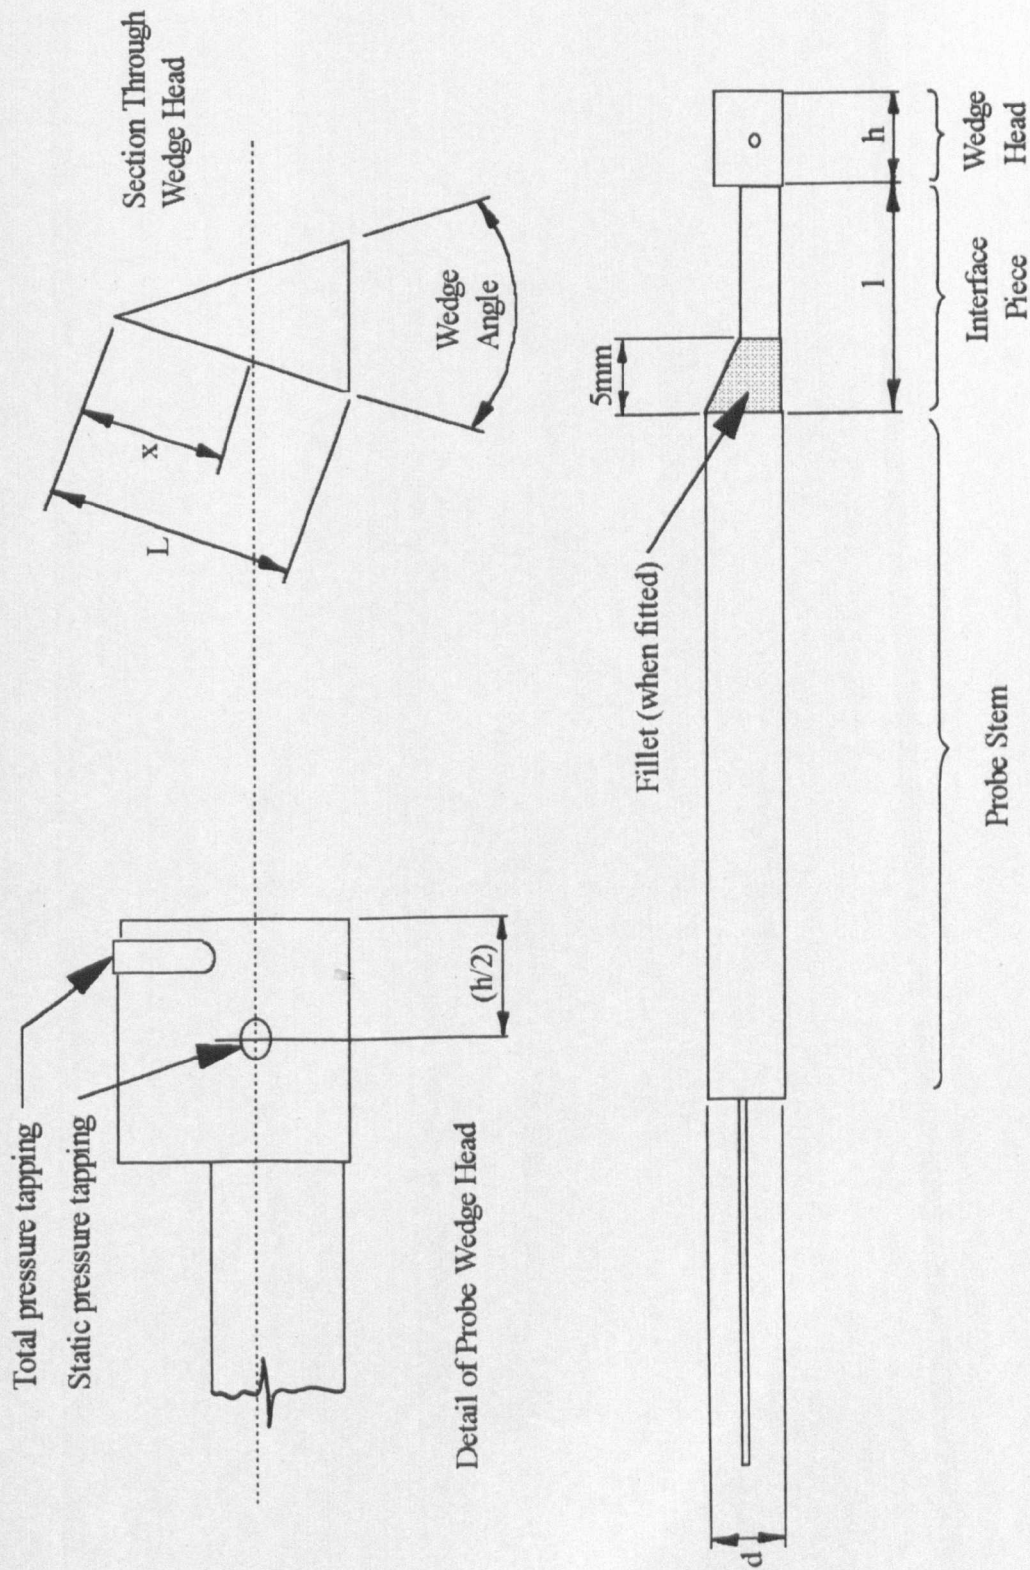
Wedge Type Pneumatic Pressure Probe
